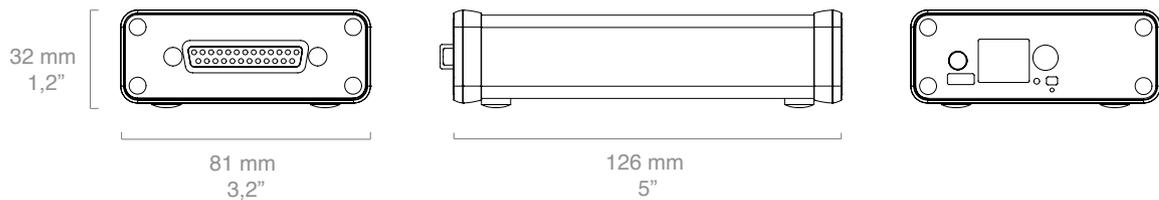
Technical drawing of ETH-GPI Link with key dimensions and layout details.
